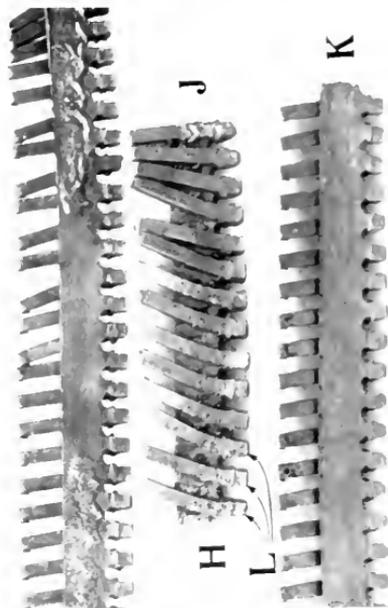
Section of Welded Copper End Ring and Rotor Bars of 150 h.p. Induction Motor. Ring melted when motor stalled, in line. Note that none of the welded joints were affected.
